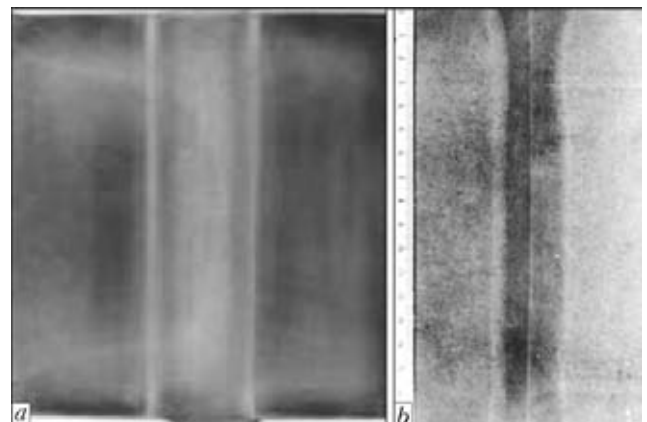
Macrostructure of welded joints on rails E76F: a – continuous flashing; b – pulsed flashing
